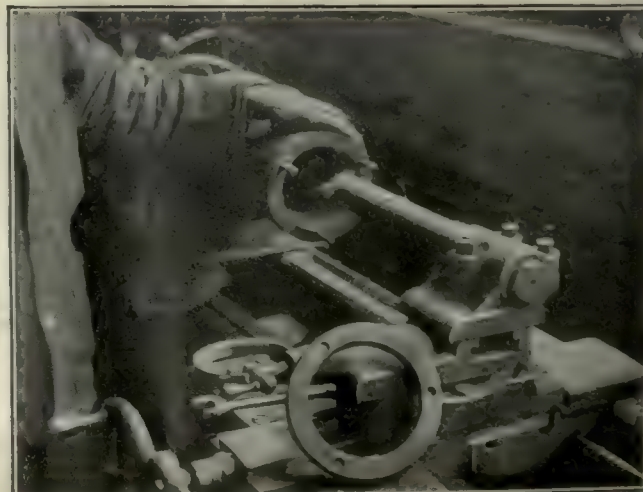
BORING INSIDE DIAMETER OF RINGS
